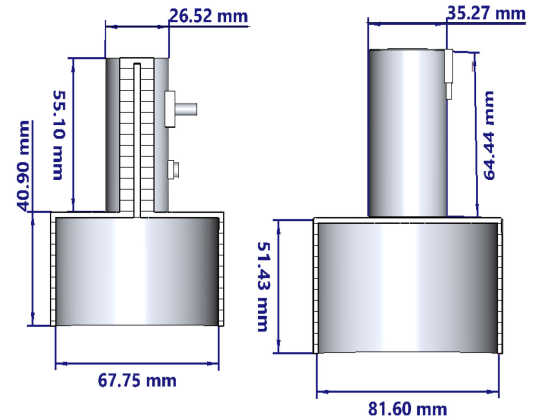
2-D cut-out view of the upper part of test cap dimensions for (a) TX and (b) RX.
